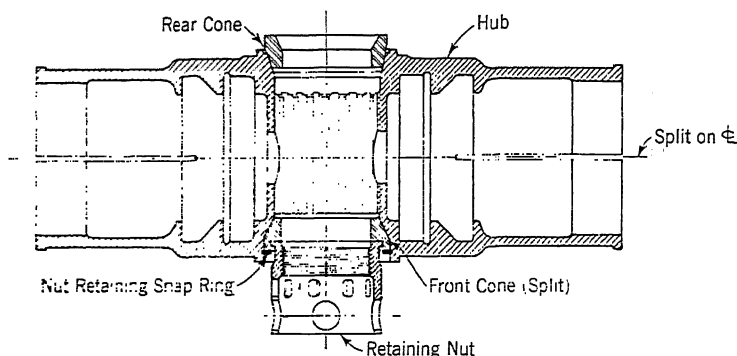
Adjustable-pitch propeller hub assembly.
